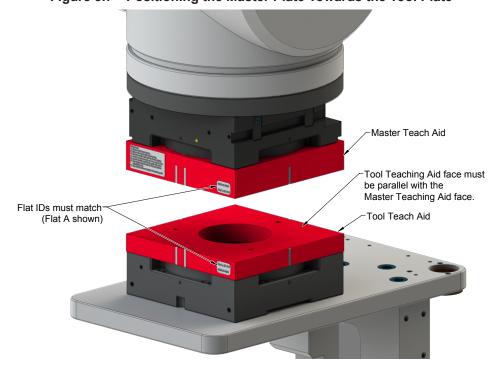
Positioning the Master Plate Towards the Tool Plate
